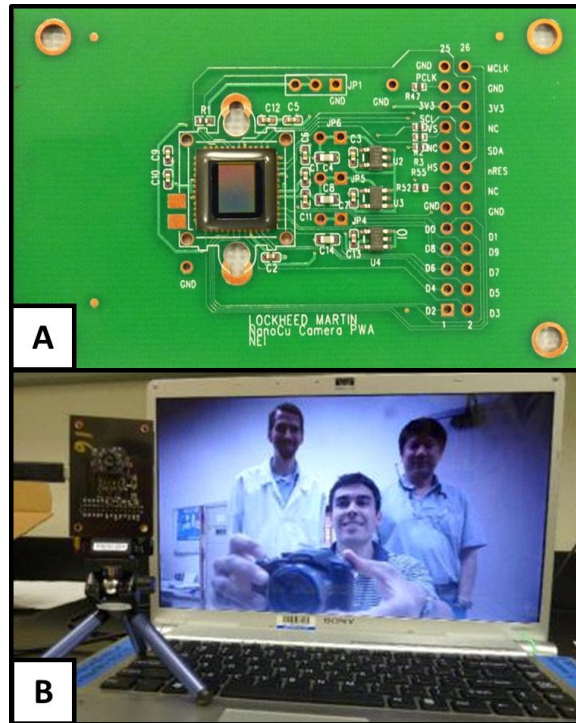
A) Photograph of a camera board populated with all surface mount components. B) Demonstration of fully functional camera board using only nanocopper.
